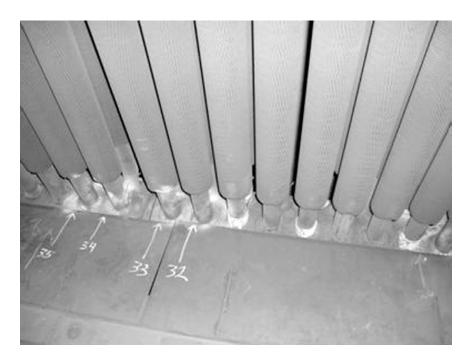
Tight Configuration of Tubes at the Tube Attachment Location
